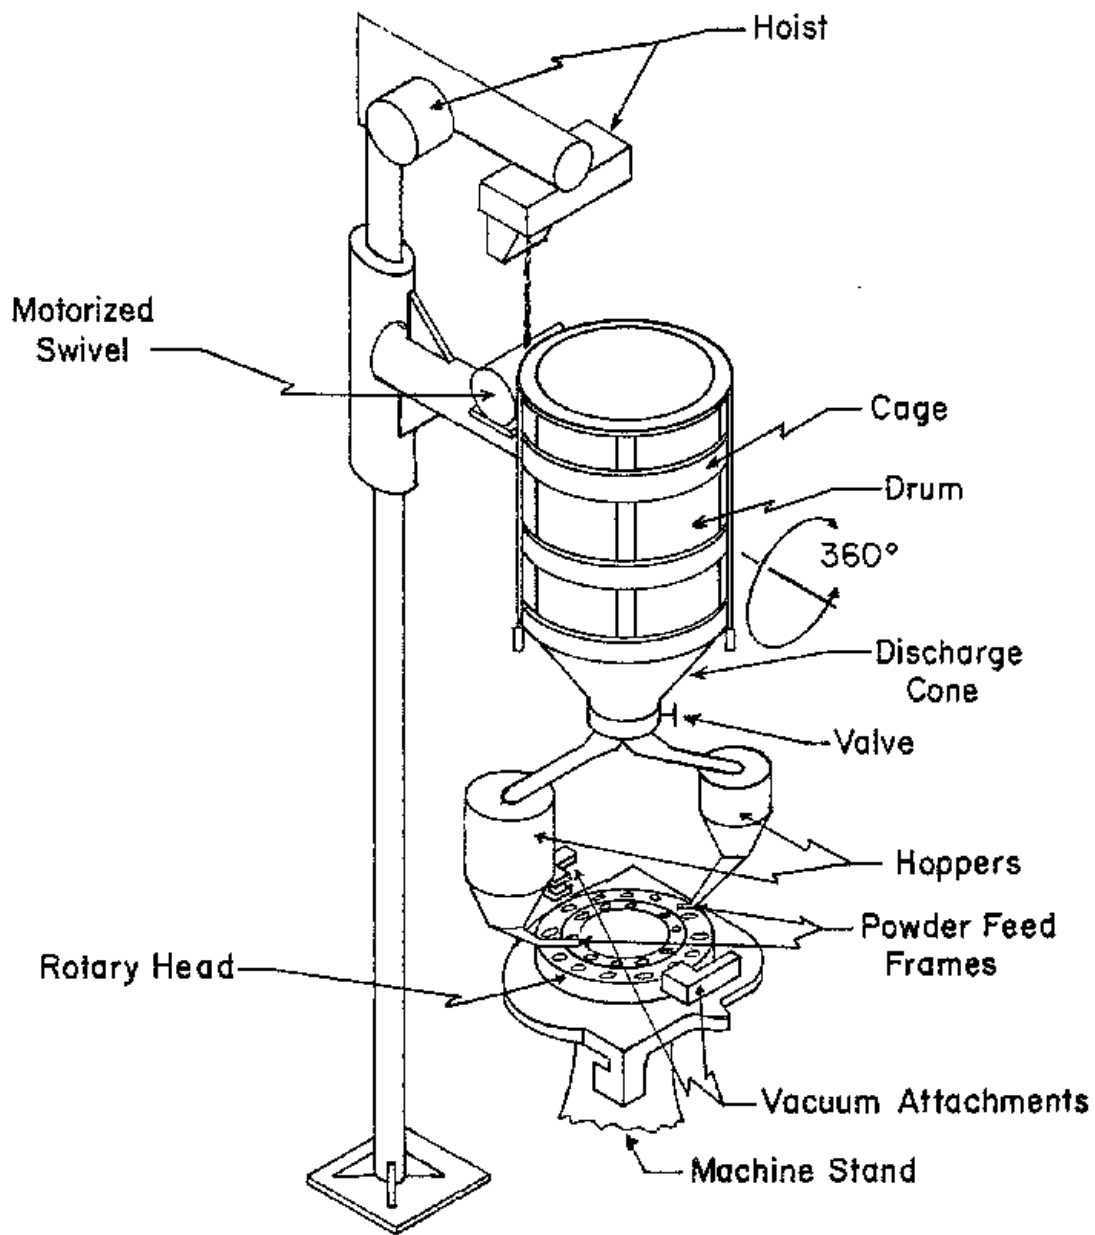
SCHEMATIC OF TABLET MACHINE AND FEED SYSTEM
